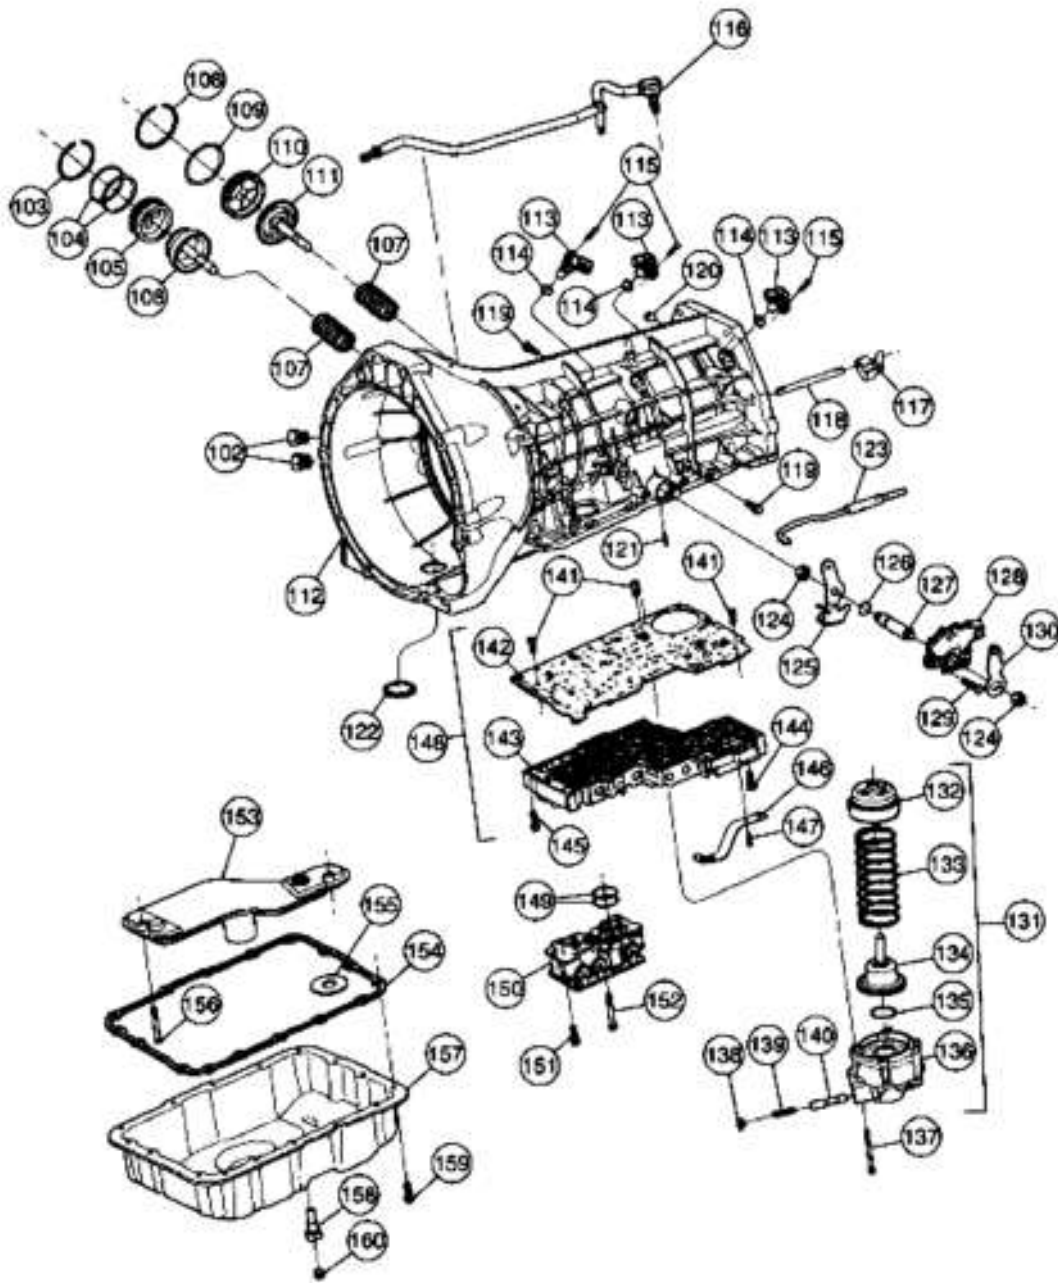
Exploded View Of Transmission Case (1 Of 8)
